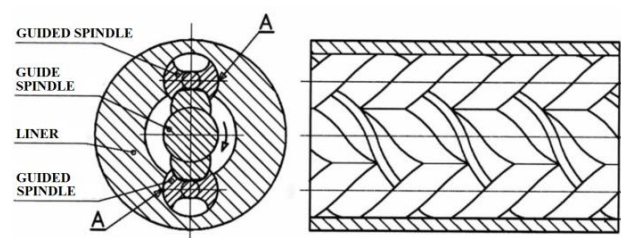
Schematic view of the spindles inside the liner of the three-spindle screw pump [3]
